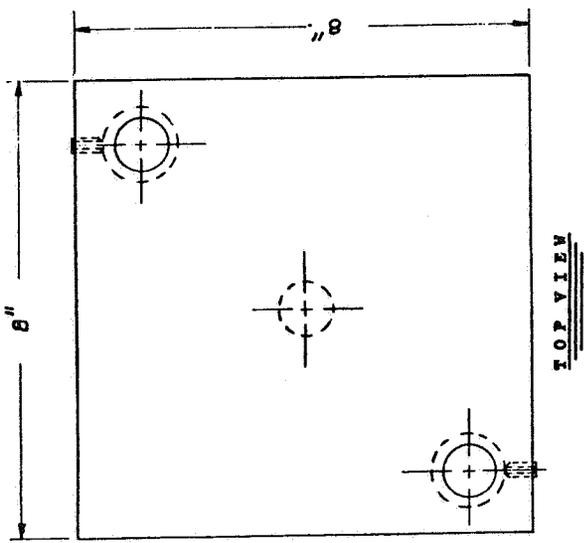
Drawing showing details of construction of a device used to make point-load tests.
